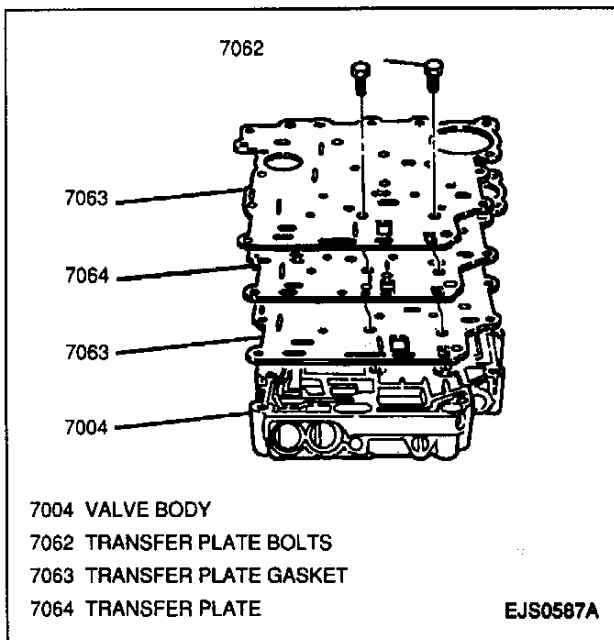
Removing Transfer Plate Retaining Bolts (3L30, 3-Speed)
